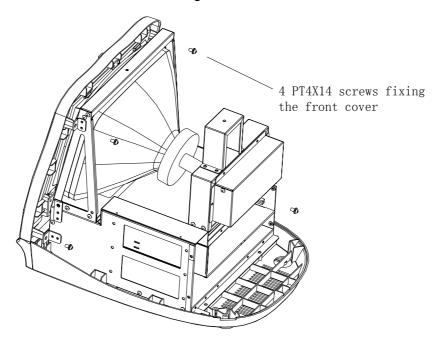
Remove 4 PT4X14 screws fixing the front cover
